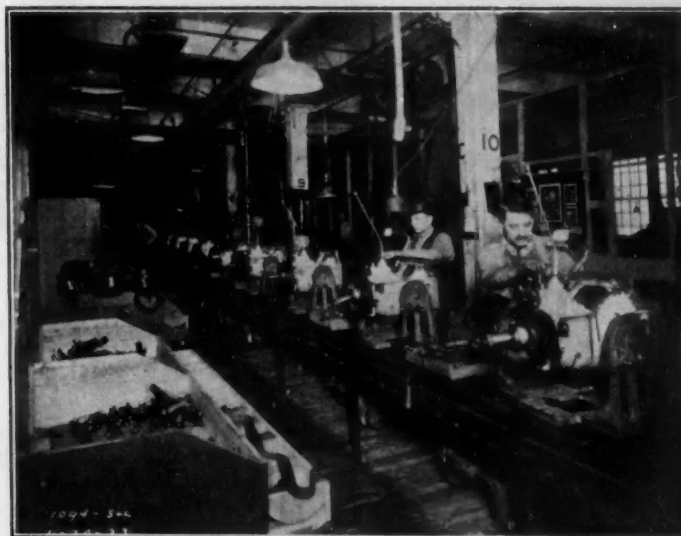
THE TRANSMISSION ASSEMBLY CONVEYOR
